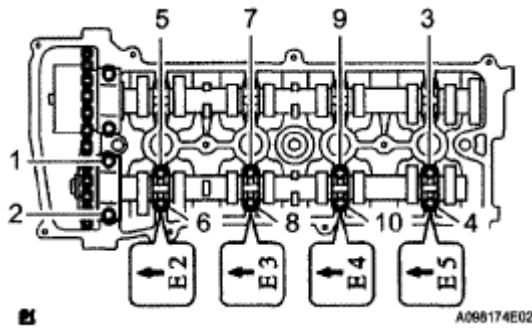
Identifying Bearing Cap Bolts In Sequence
